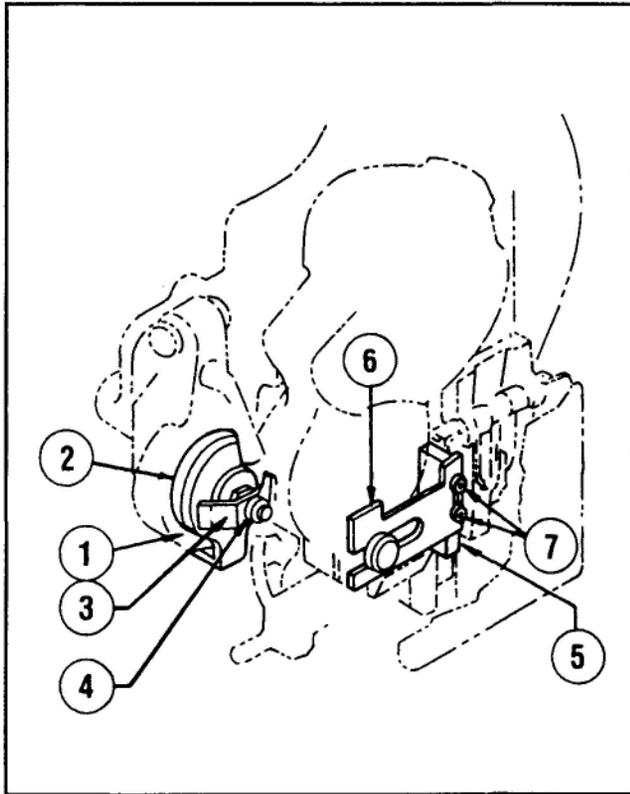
Wire Feed Brake Tension and Wire Guide Adjustments (Long and Extra Long Draw Heads)
